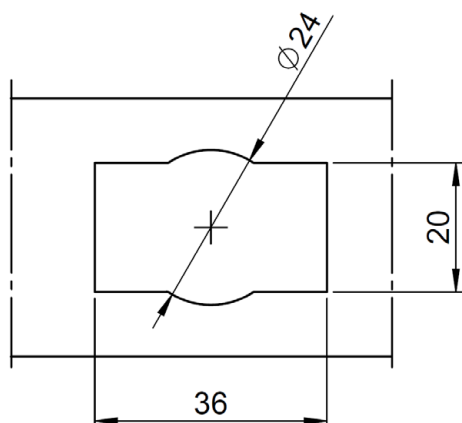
Dimensions of the opening of the attachment part for passing through the threaded plate of the Varifix® power knob 41 (Dimensions in mm)
